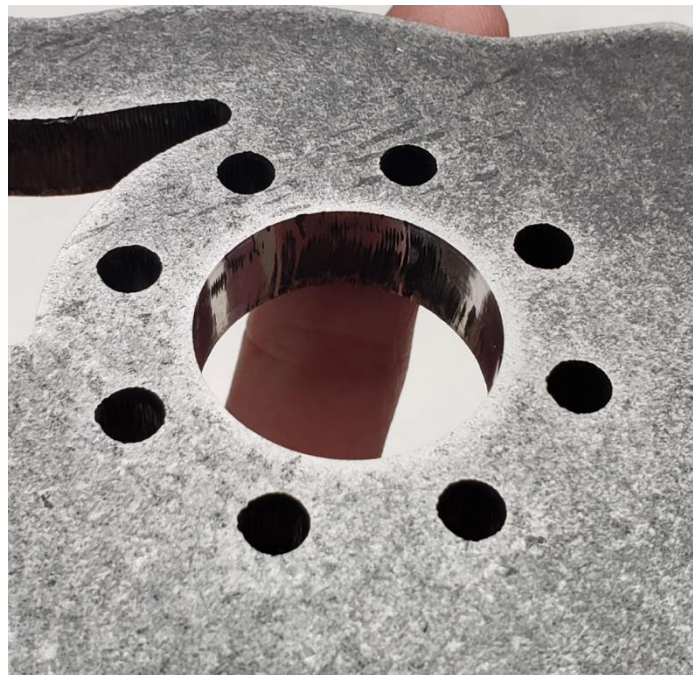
Milling AR500 Blade for Bearing Press Fit
